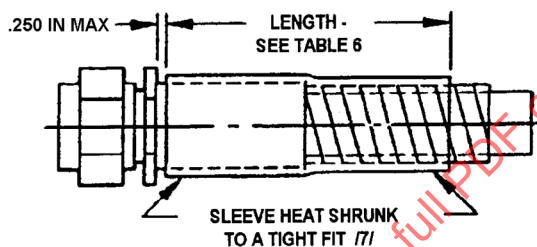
ABRASION SLEEVE ATTACHMENT
